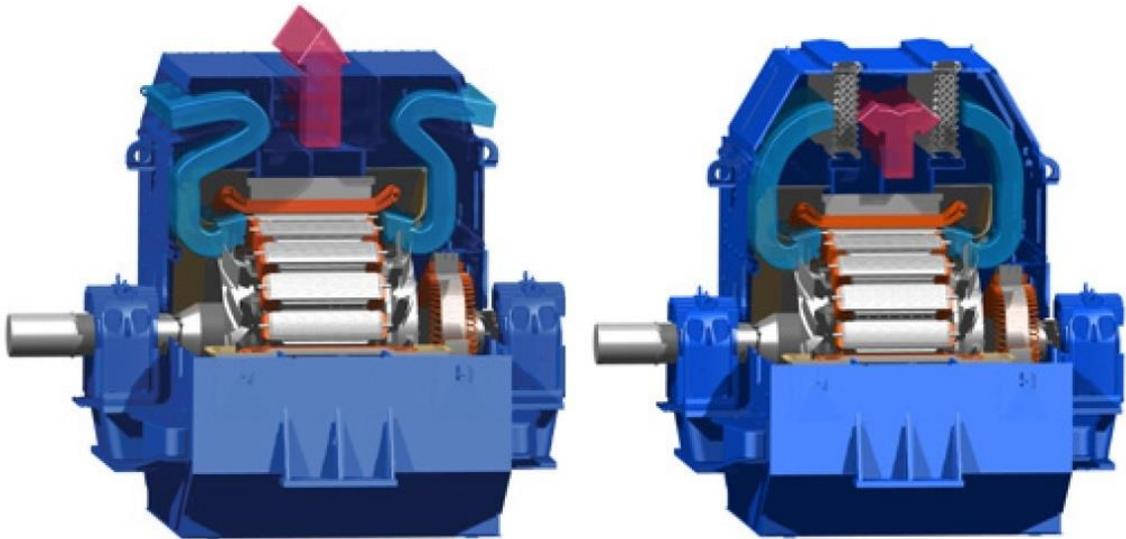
Exploded view of large synchronous generator (ABB, 2018).
